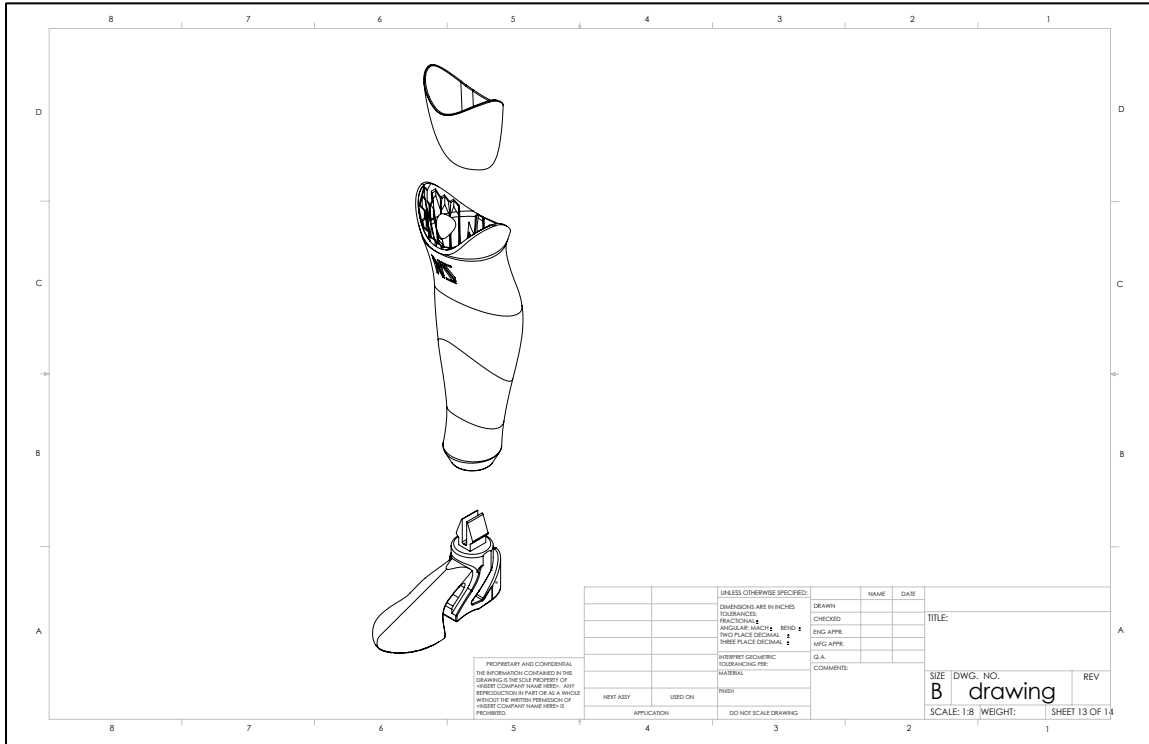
Neo-Strength Lower Leg Prosthetic Exploded View Control Drawings
